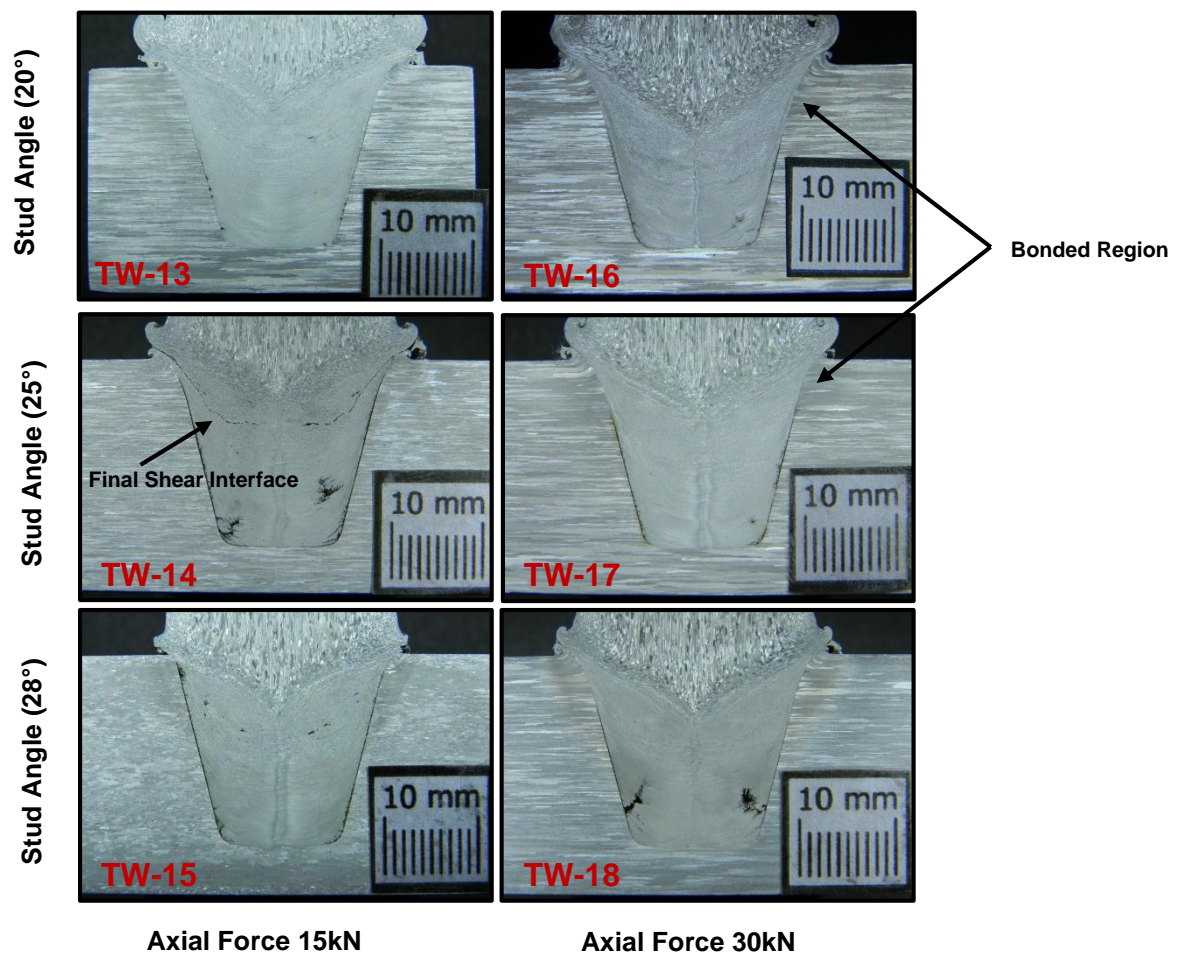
Welds TW-13 to TW-18 Macrographs
